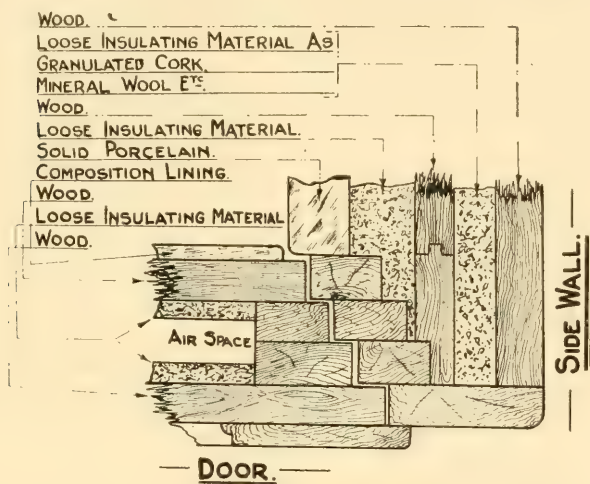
TYPICAL REFRIGERATOR WALL AND DOOR CONSTRUCTION.
